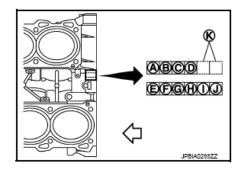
Identifying Housing Grade And Bore Grade On Cylinder Block Courtesy of NISSAN NORTH AMERICA, INC.
